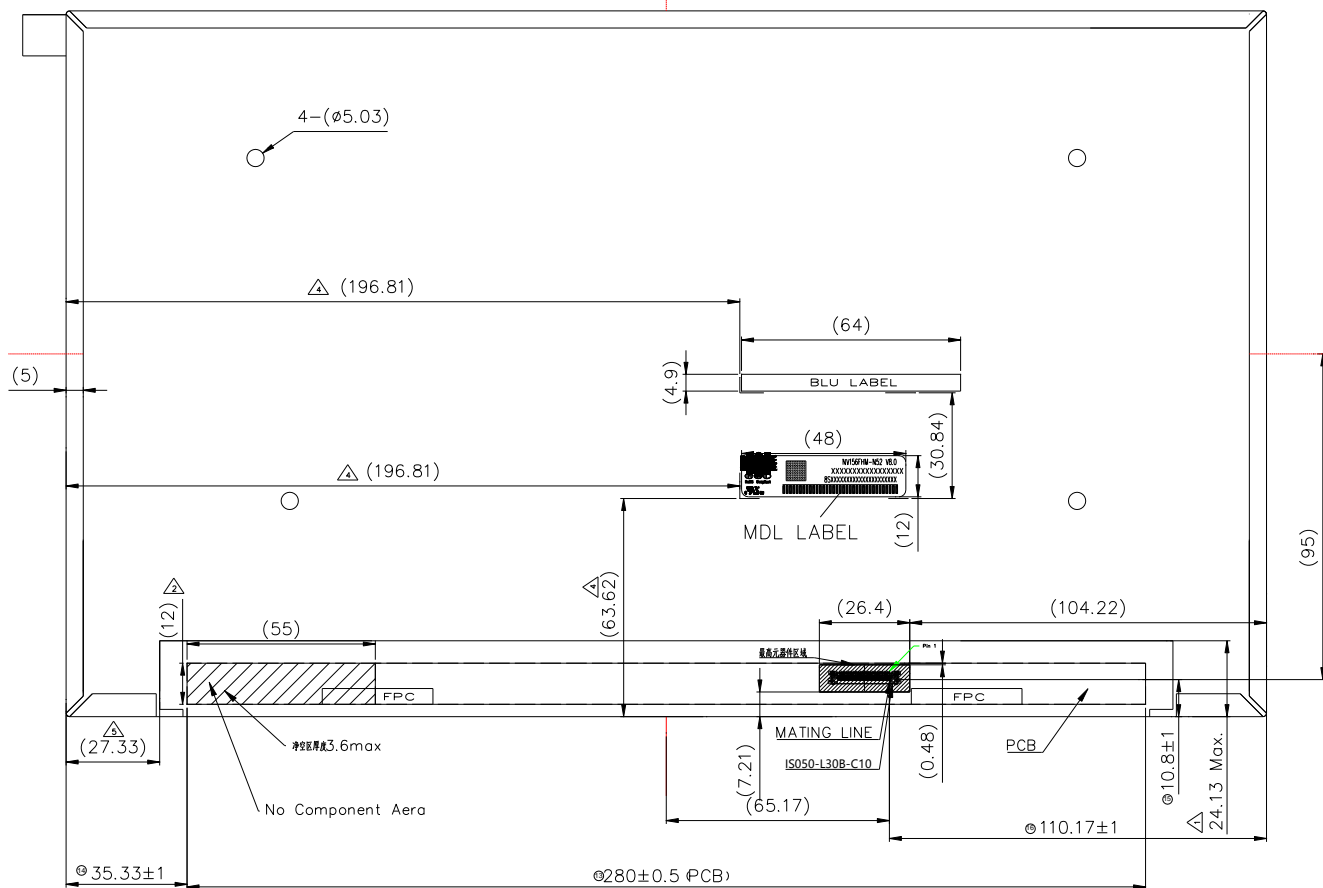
TFT-LCD Module Outline Dimensions (Rear view)
